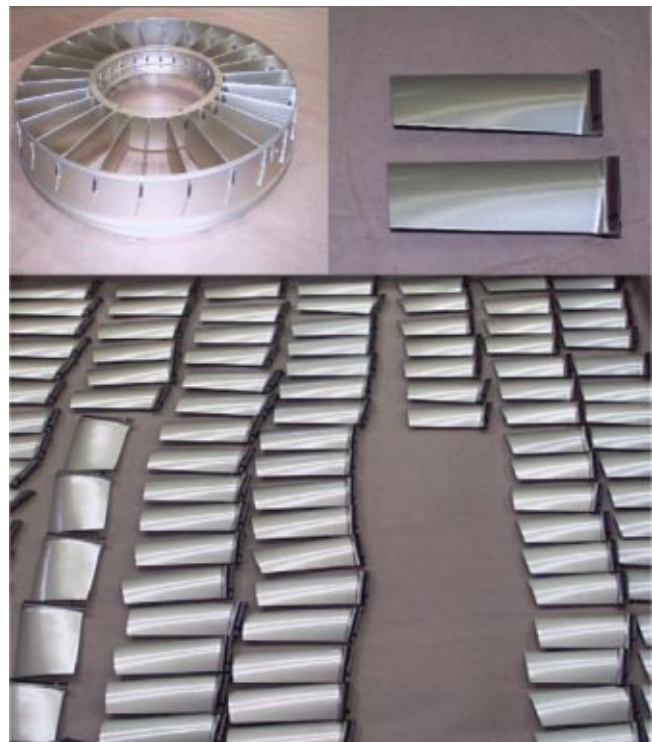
Inlet guide vanes and compressor blades coated with Sermaflow S-4000
